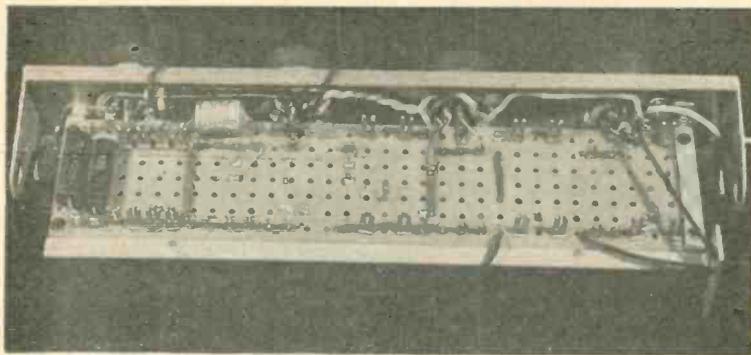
Resistor mounting card assembled in small chassis with four sockets attached. Terminal lugs may be staked into any desired holes in the board, and thus fit any circuit. Grid and input circuit components are on the top side; plate and decoupling components are located on the bottom.
